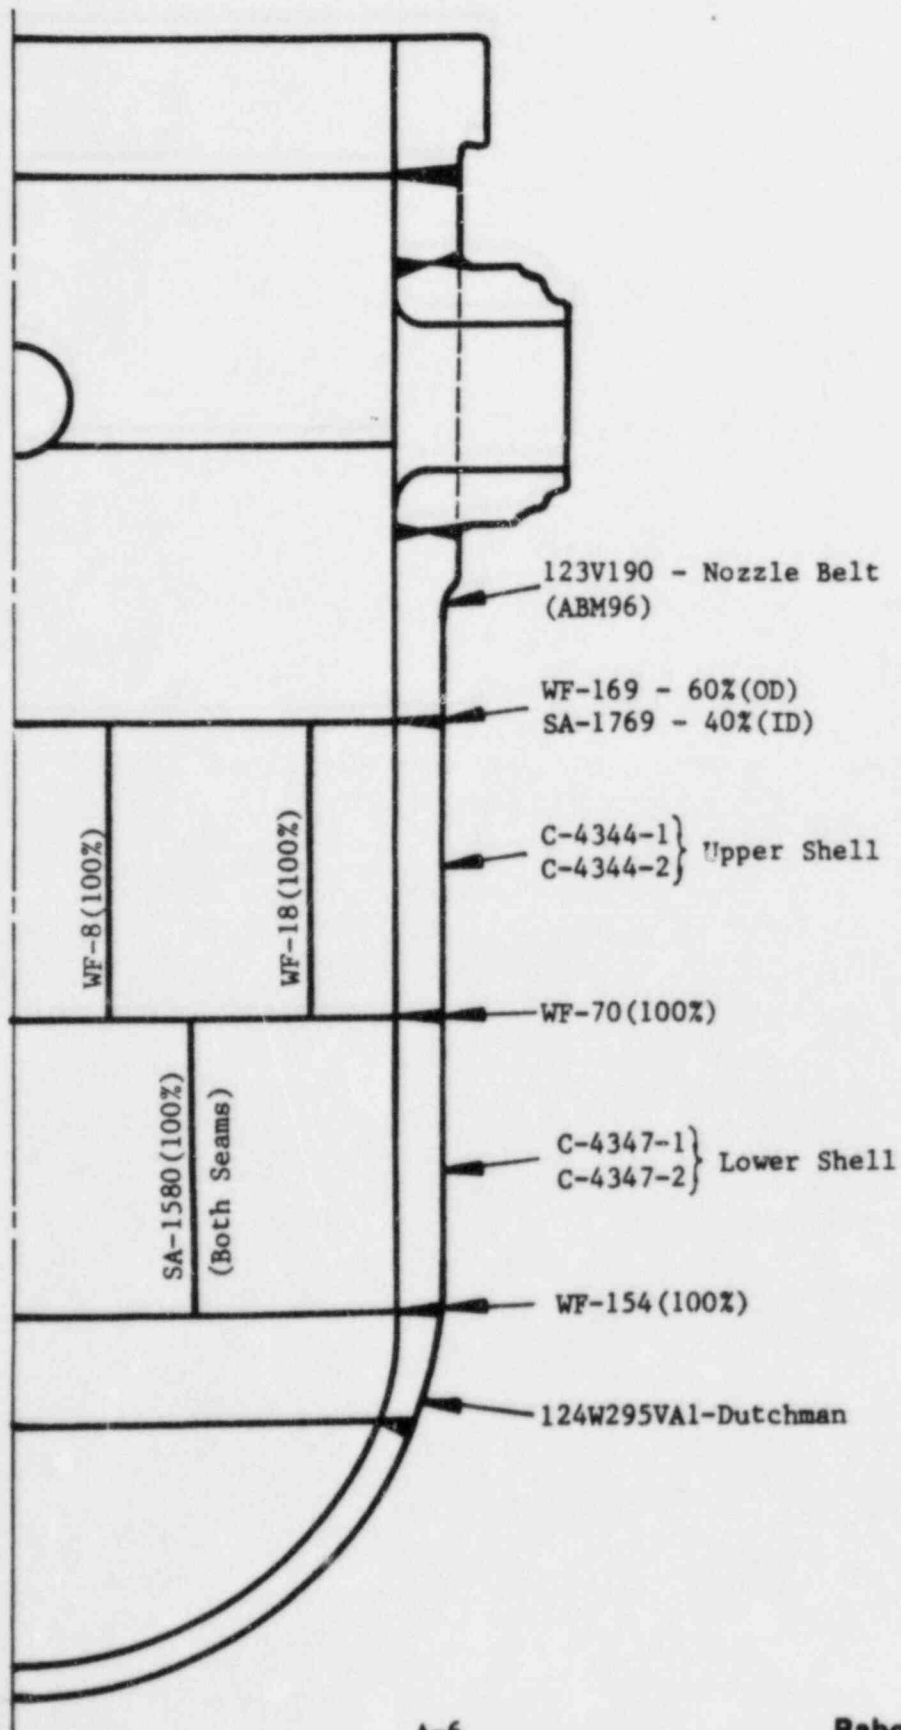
Location of Longitudinal Welds in Upper and Lower Shell Courses
